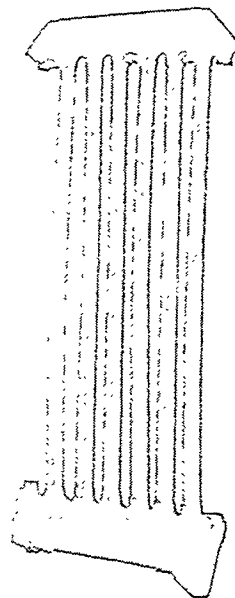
Test Pin Candelabra Casting After Mold Knock Out
